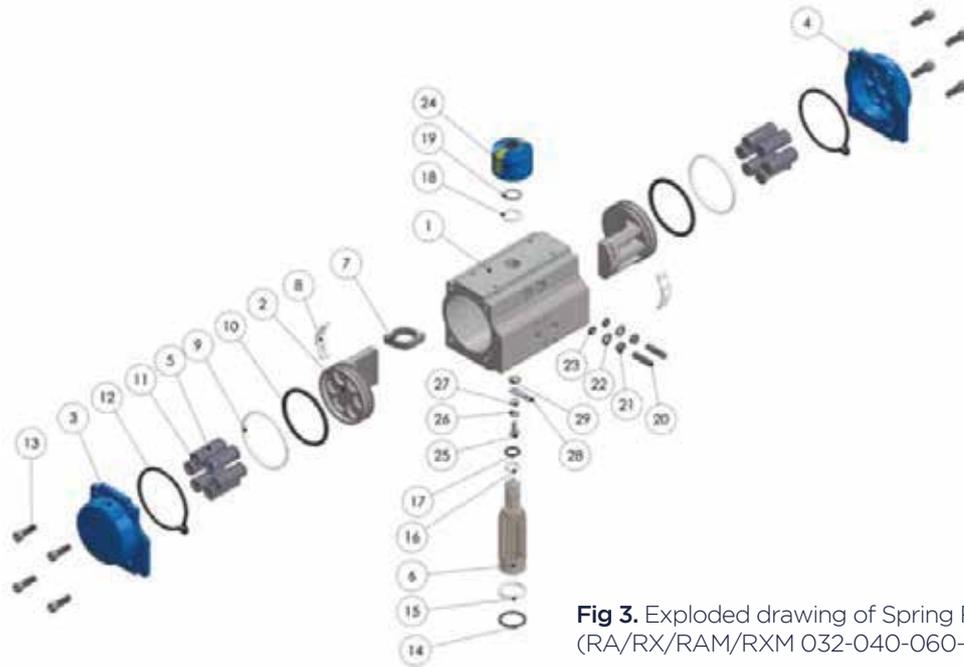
Exploded drawing of Spring Return Actuators (RA/RX/RAM/RXM 032-040-060-080-100-200 SR)
